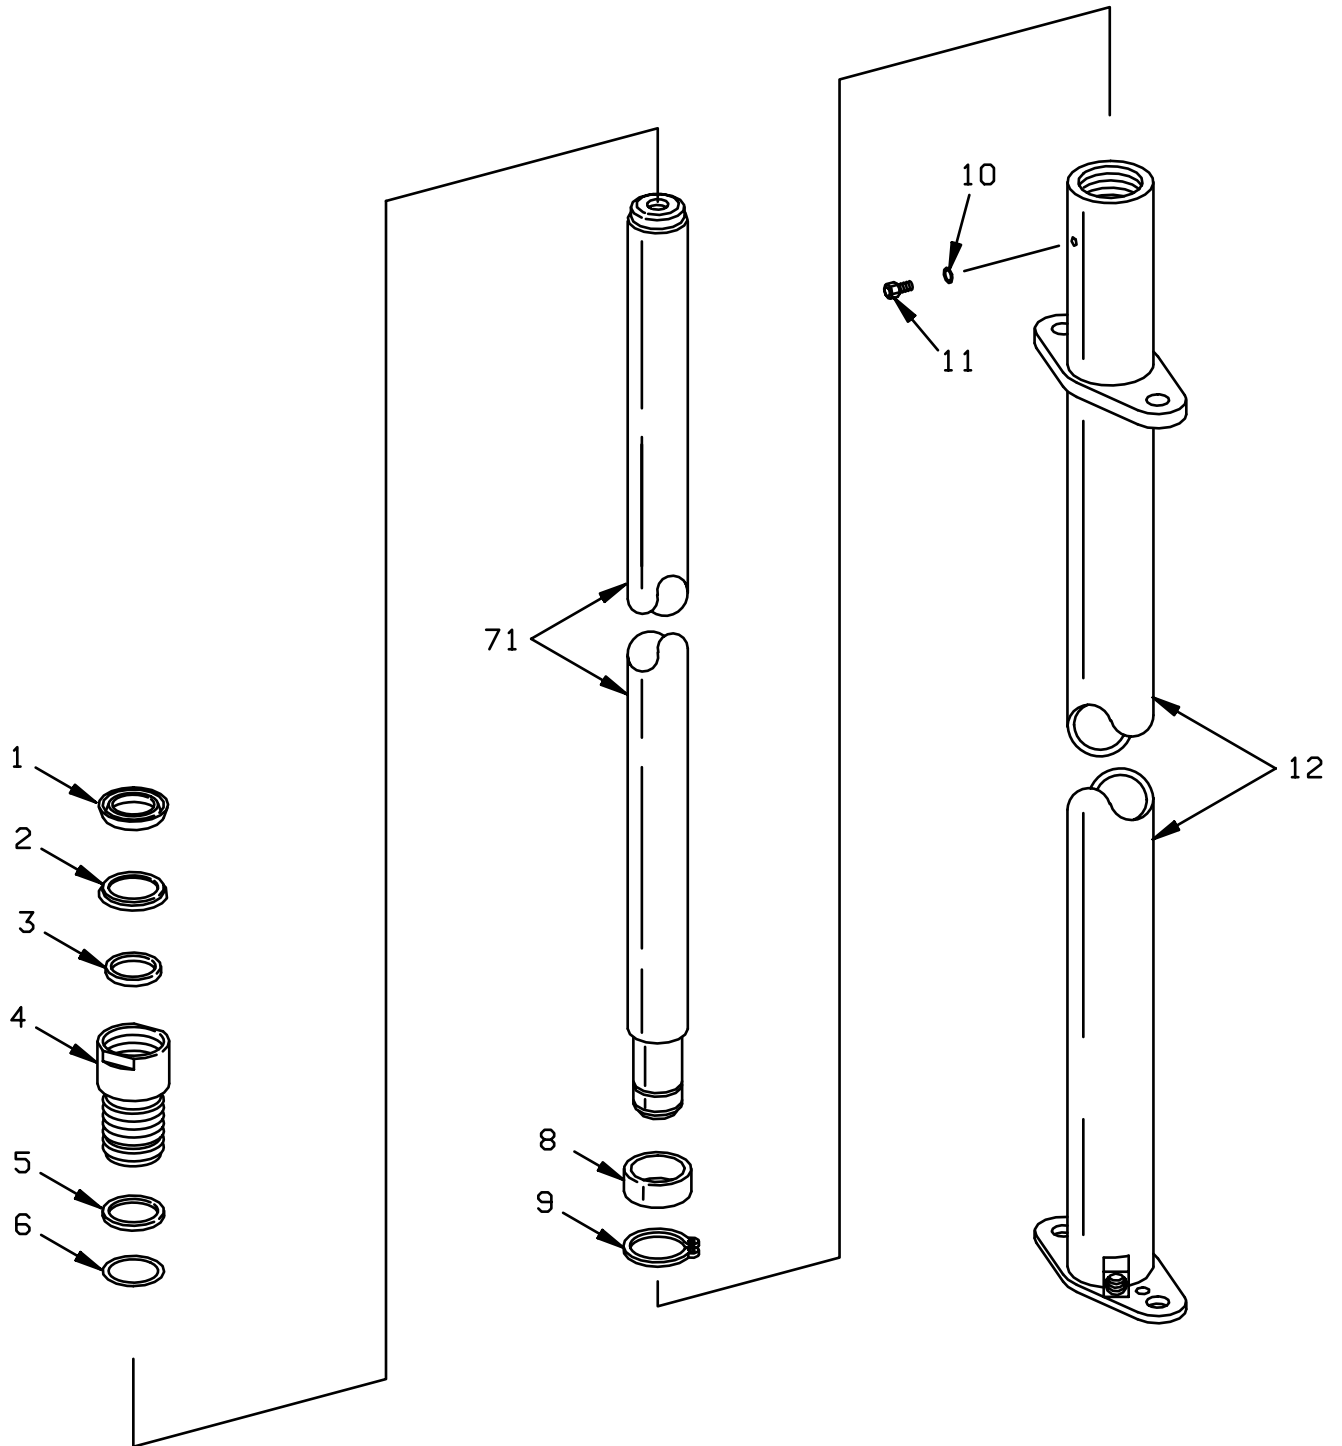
TWO STAGE MAST REACH CYLINDER ASSEMBLY (301317-XXX)
